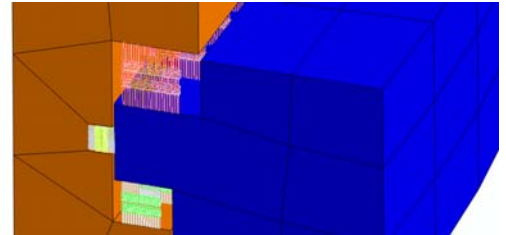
Large bearing FEM model using non linear FEM elements to simulate the bearing rolling elements.
